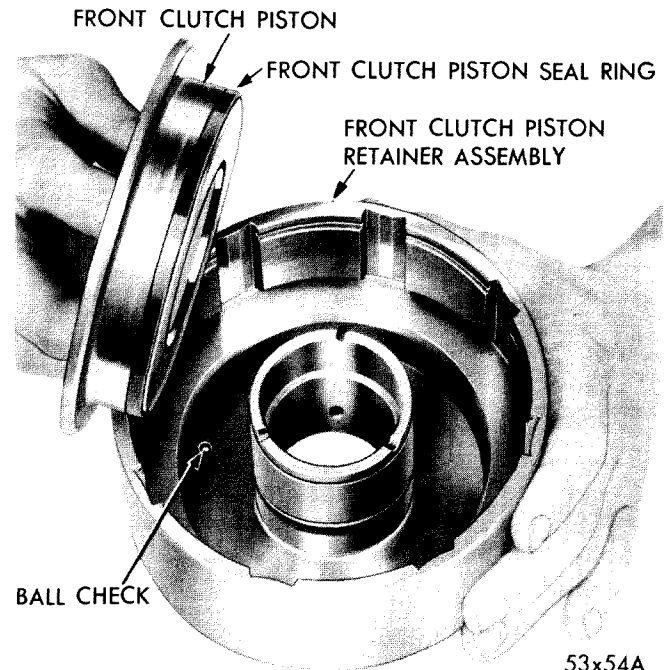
Removal and Installation of Front Clutch Piston Assembly
